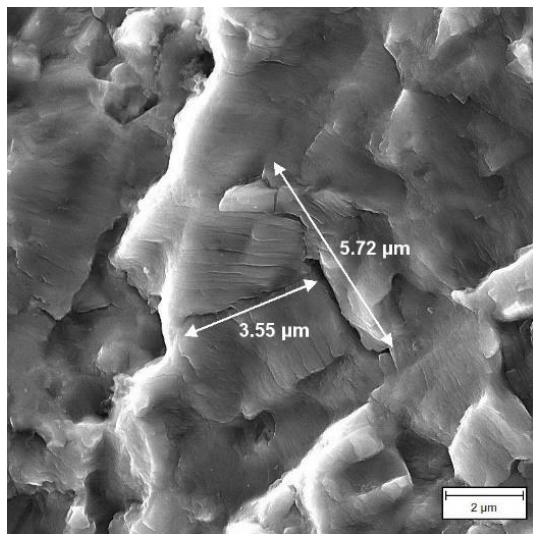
Typical fatigue cracks and their dimensions.
